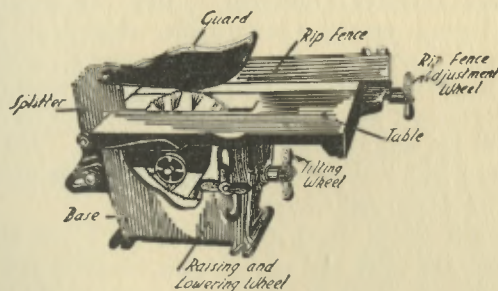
THE DRIVER 7-INCH CIRCULAR SAW
